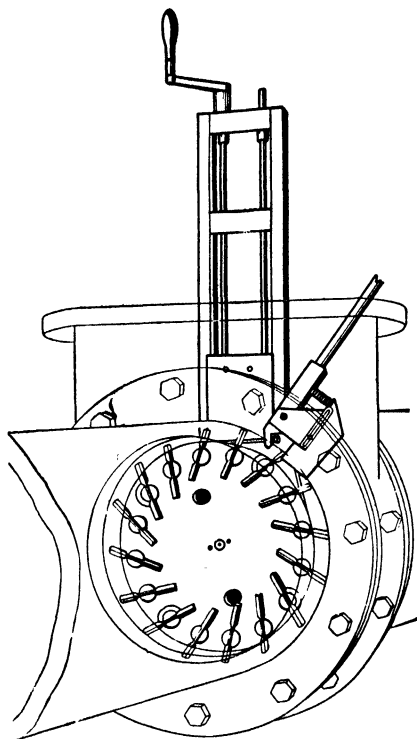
Tool kits are available for refinishing valve seats in place.
